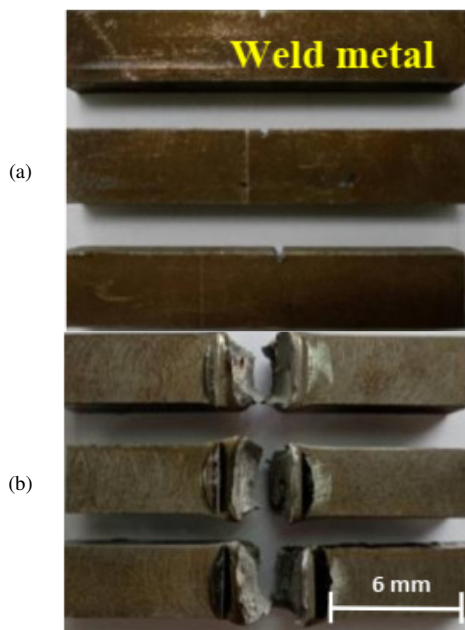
Characteristics of specimen before and after impact testing at the weld metal: (a) before fracture, (b) after fracture.
